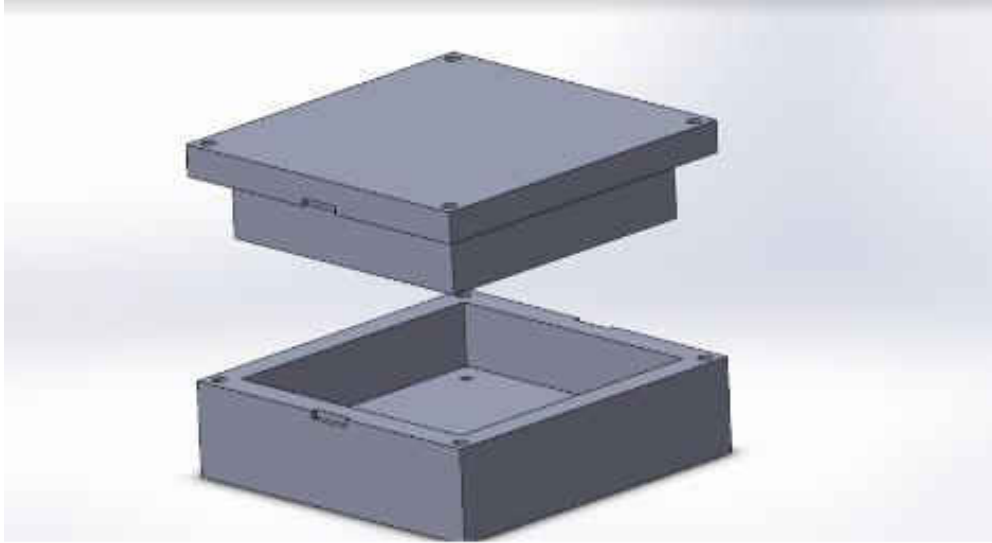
SolidWorks CAD Model for 127x127 mm Mold
